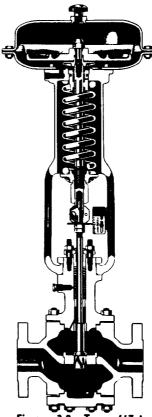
Type 667-A control valve with single port, top and port guided Micro-Flute valve plug.
